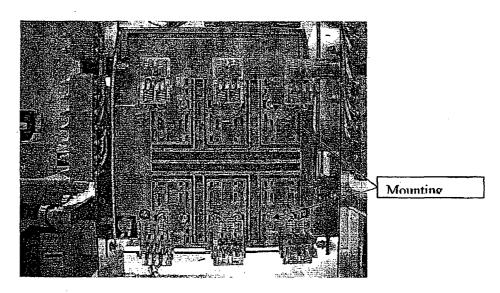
Location of Primary Disconnect Stabs to Back Panel Mounting Bolts (qty=12)
